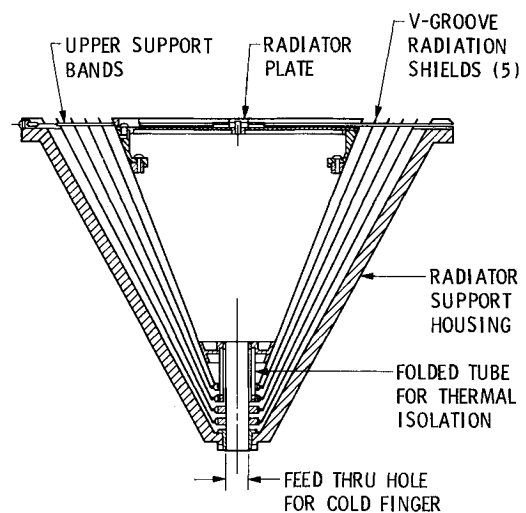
Cross-sectional view of V-groove shield assembly and support structure of flight-like VGIR.
